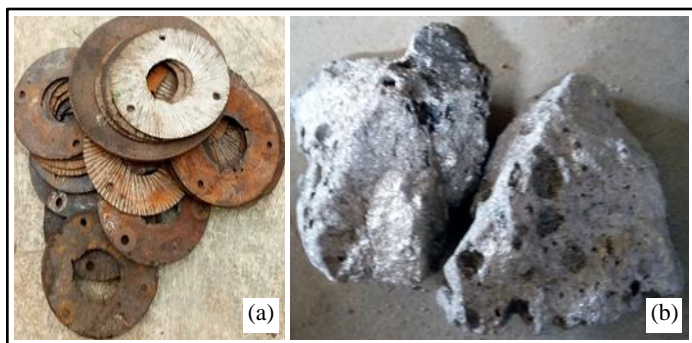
Scrap grinding disc (a) and FeCr used for casting of the specimens (b)
